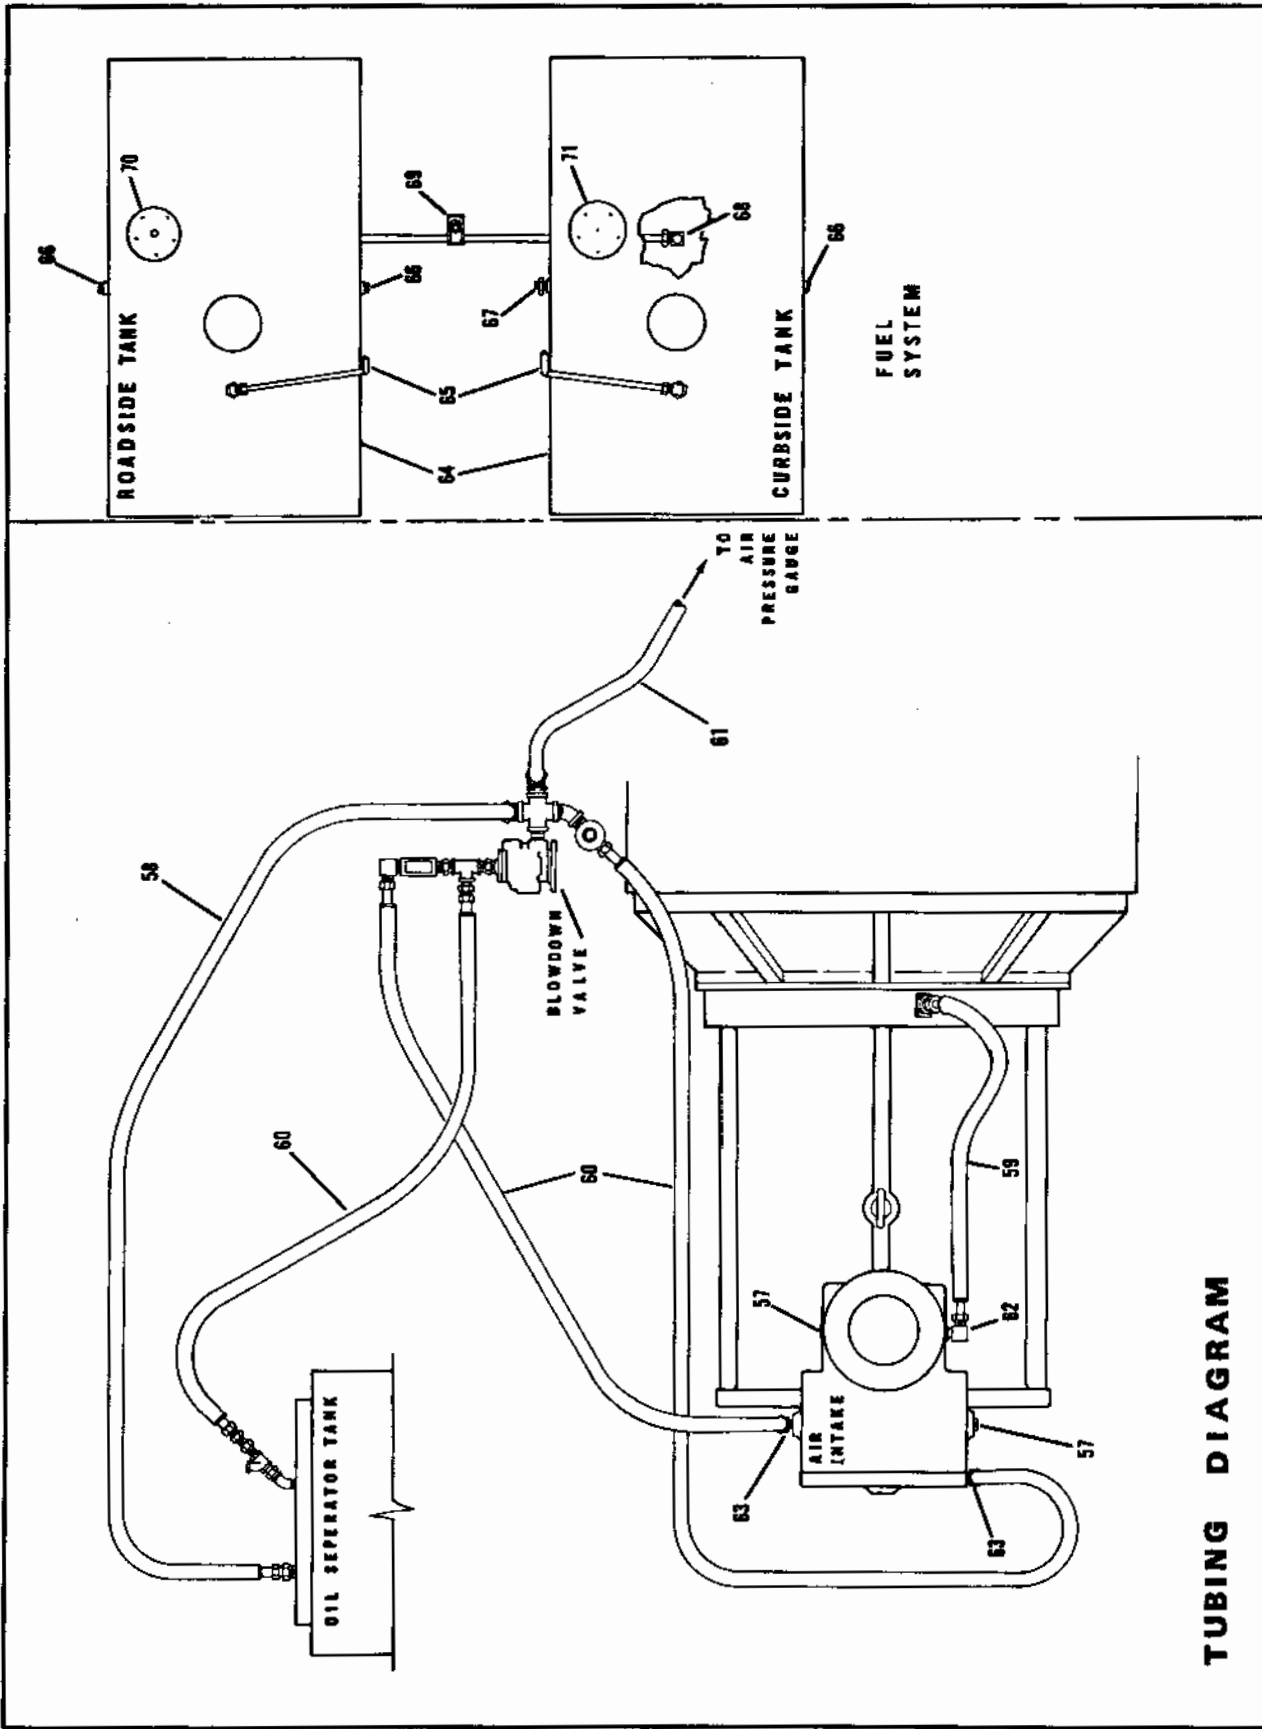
Air Compressor Unit Assembly (Sheet 1 of 4)
